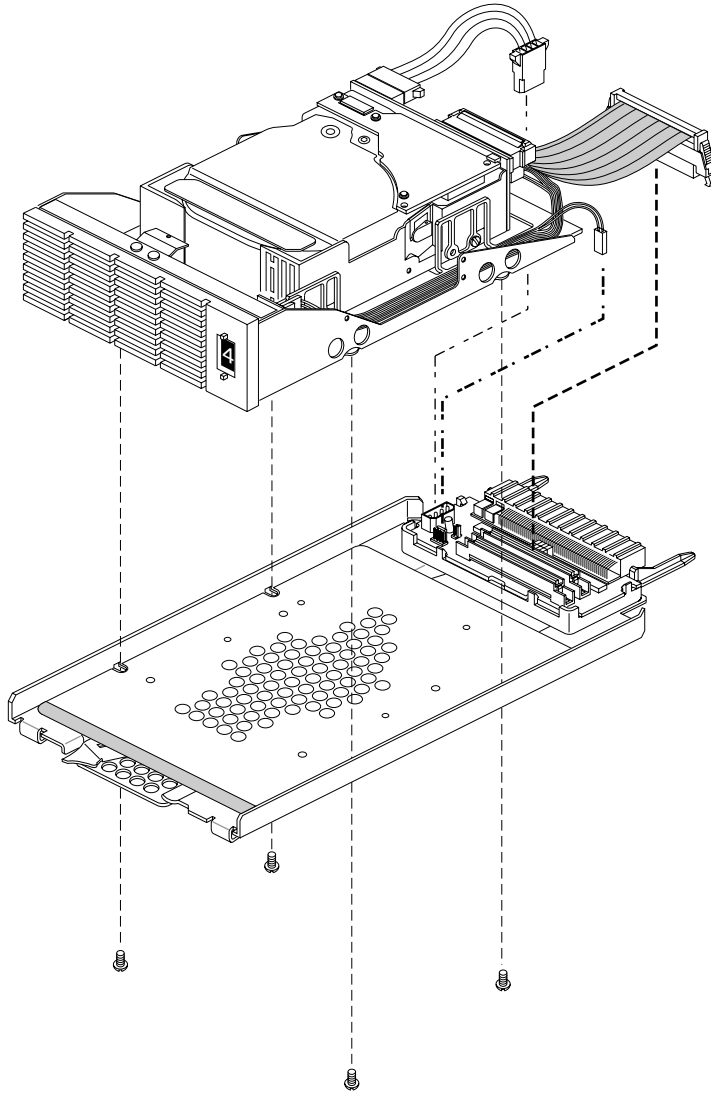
Remove the Screws from the Disk and Sled Assembly
